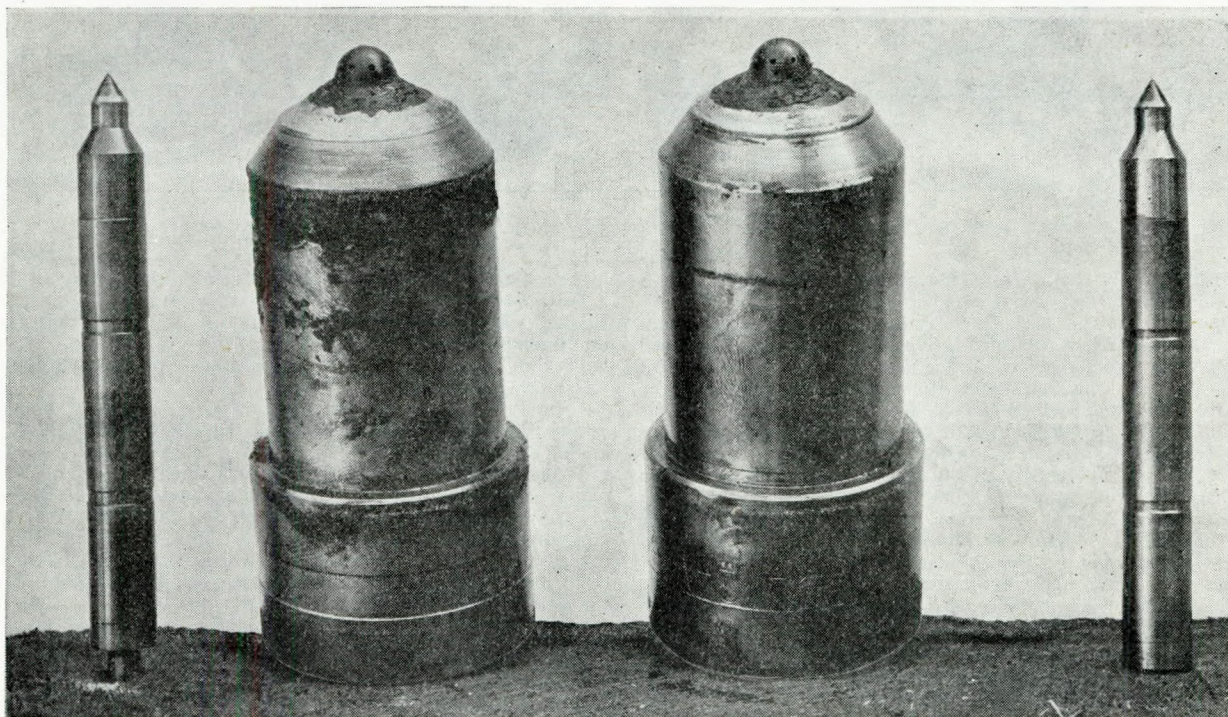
Fuel valve nozzles and needle valves after 990 and 4,768 hours' service.
